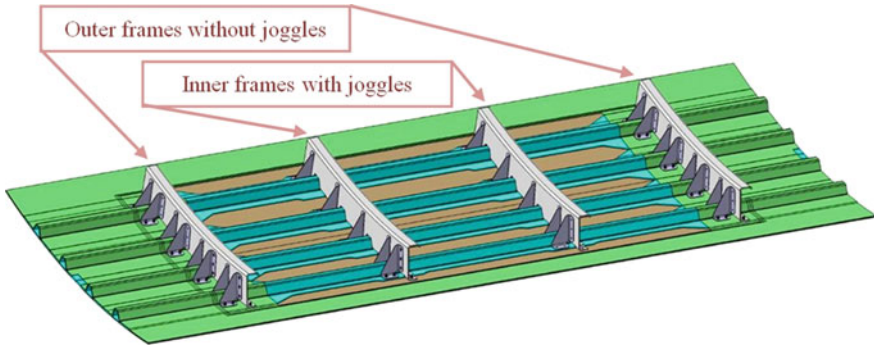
CAD model of the assembled lower panel showing position of frames (with joggles for the inner ones), and the differing cleats arrangement (more required for the outer frames)
